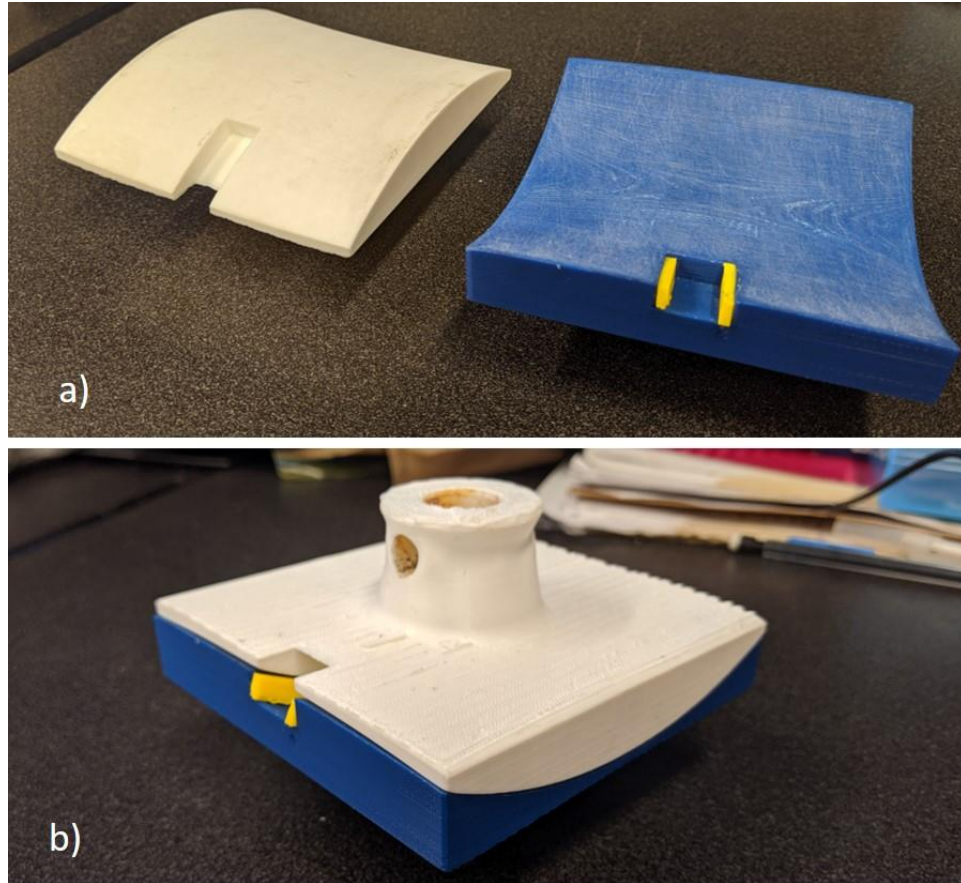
The two parts of saddle-like shape bending fixture are 3D printed separately as seen in a), and they can be clamped together during the test as seen in b).
